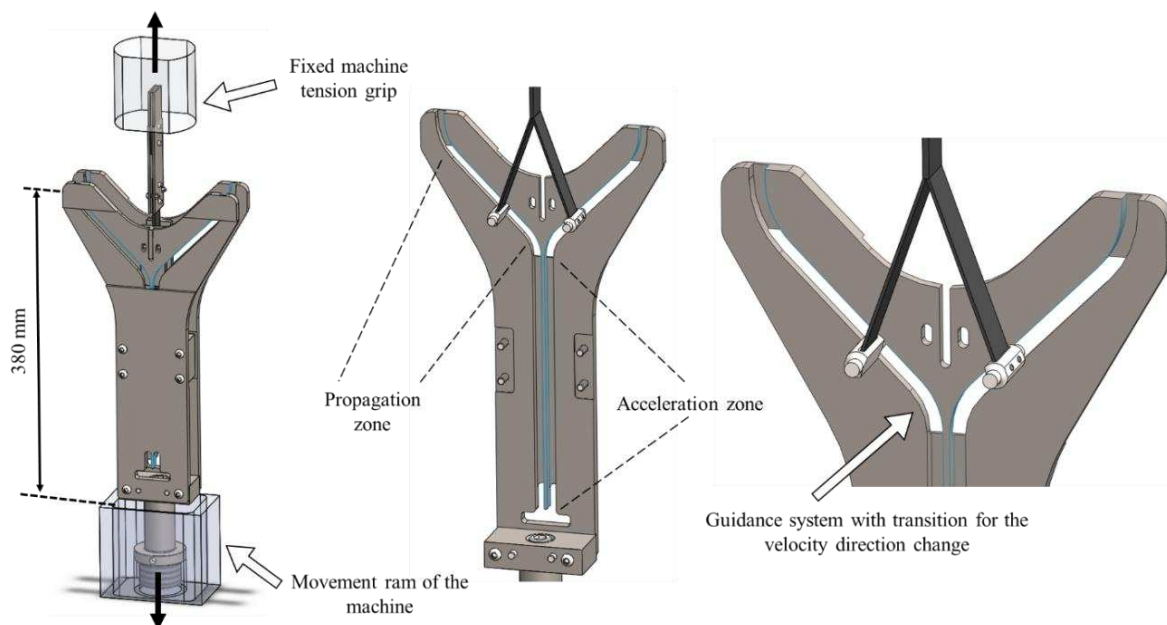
Guided Double Cantilever Beam (GDCB) test method parts and way of loading.
